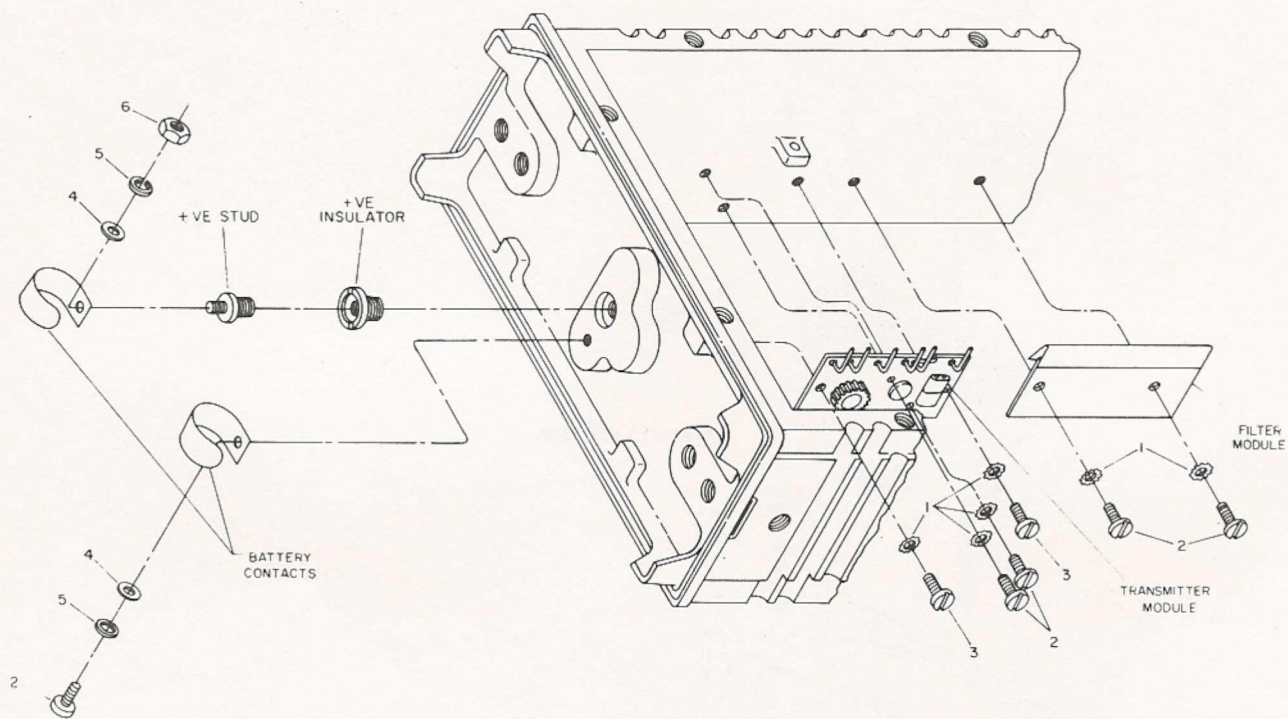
ERC-310 Exploded View (Sheet 1 of 3)
